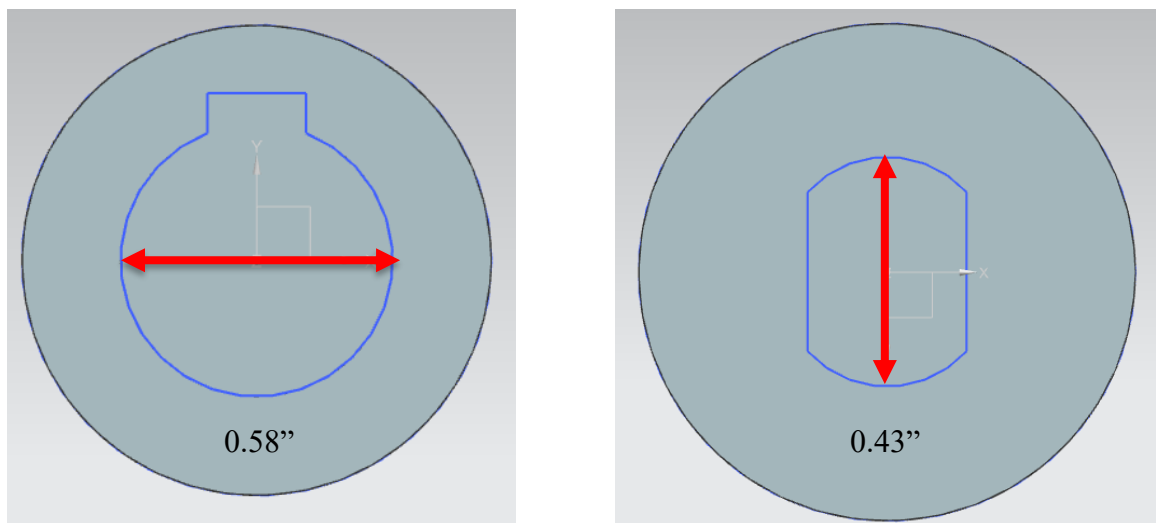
Thermal Standoff Motor connection dimensions, motor (Left) and valve (Right) connection
